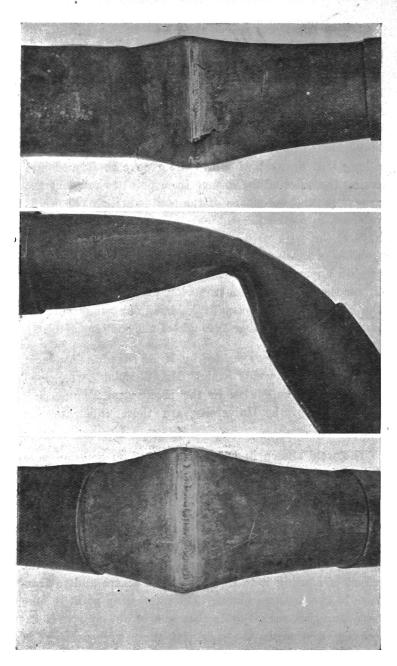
Three Views of Welded Bore-tube after Welding.
